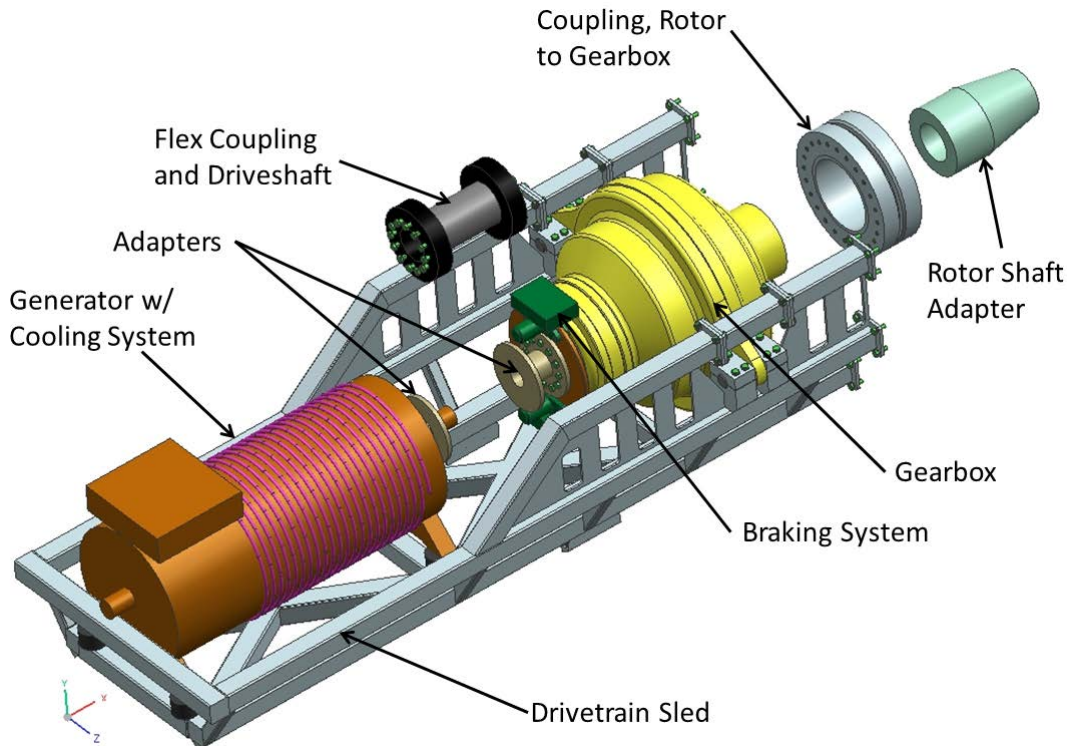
Drivetrain assembly mounted in drivetrain sled.
